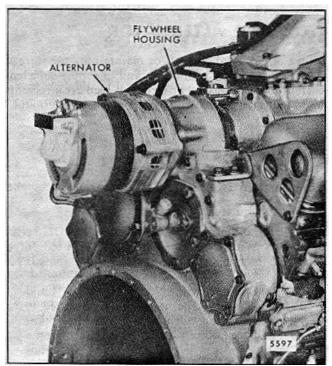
Typical Flange-Mounted Alternator (Beltless)
